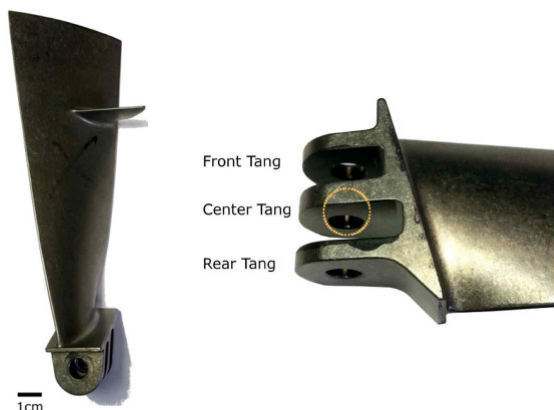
Shape of J85 engine compressor 1st stage rotor blade and its tangs
